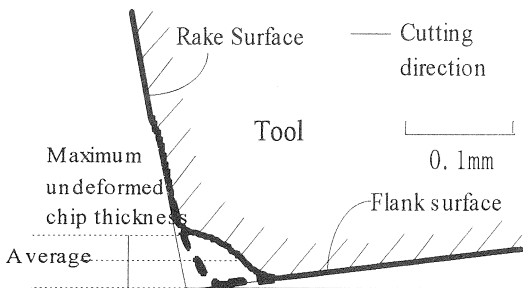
Shape of Cutting Edge (A Worn Cutter)
